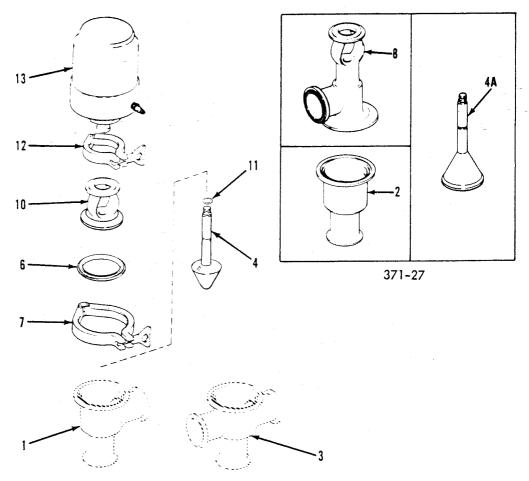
Type 371-10, 371-30 & 371-27 Throttling Valve, Exploded View PARTS LIST FOR TYPES 10, 27, AND 30 THROTTLING VALVE
